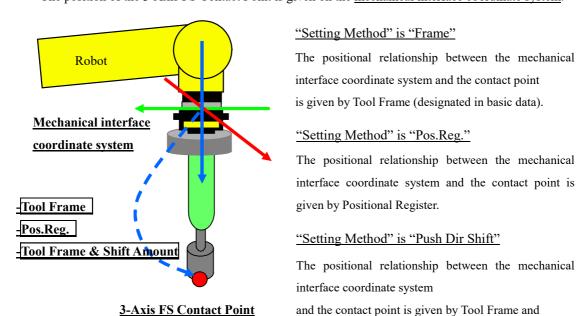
(b) Setting of "3-Axis FS ContactP. Position"
